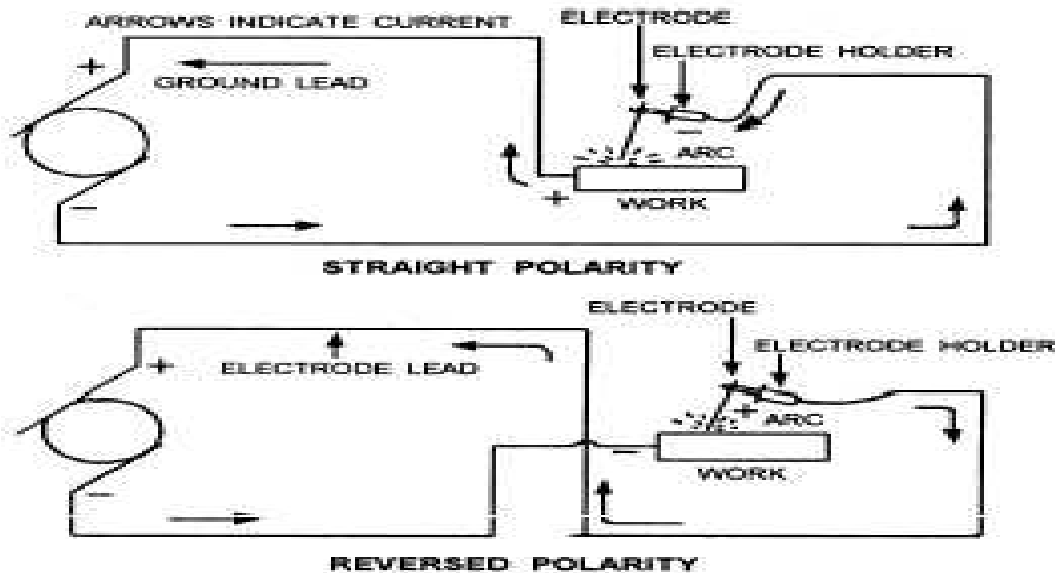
Straight and Reverse Polarity of arc welding process
